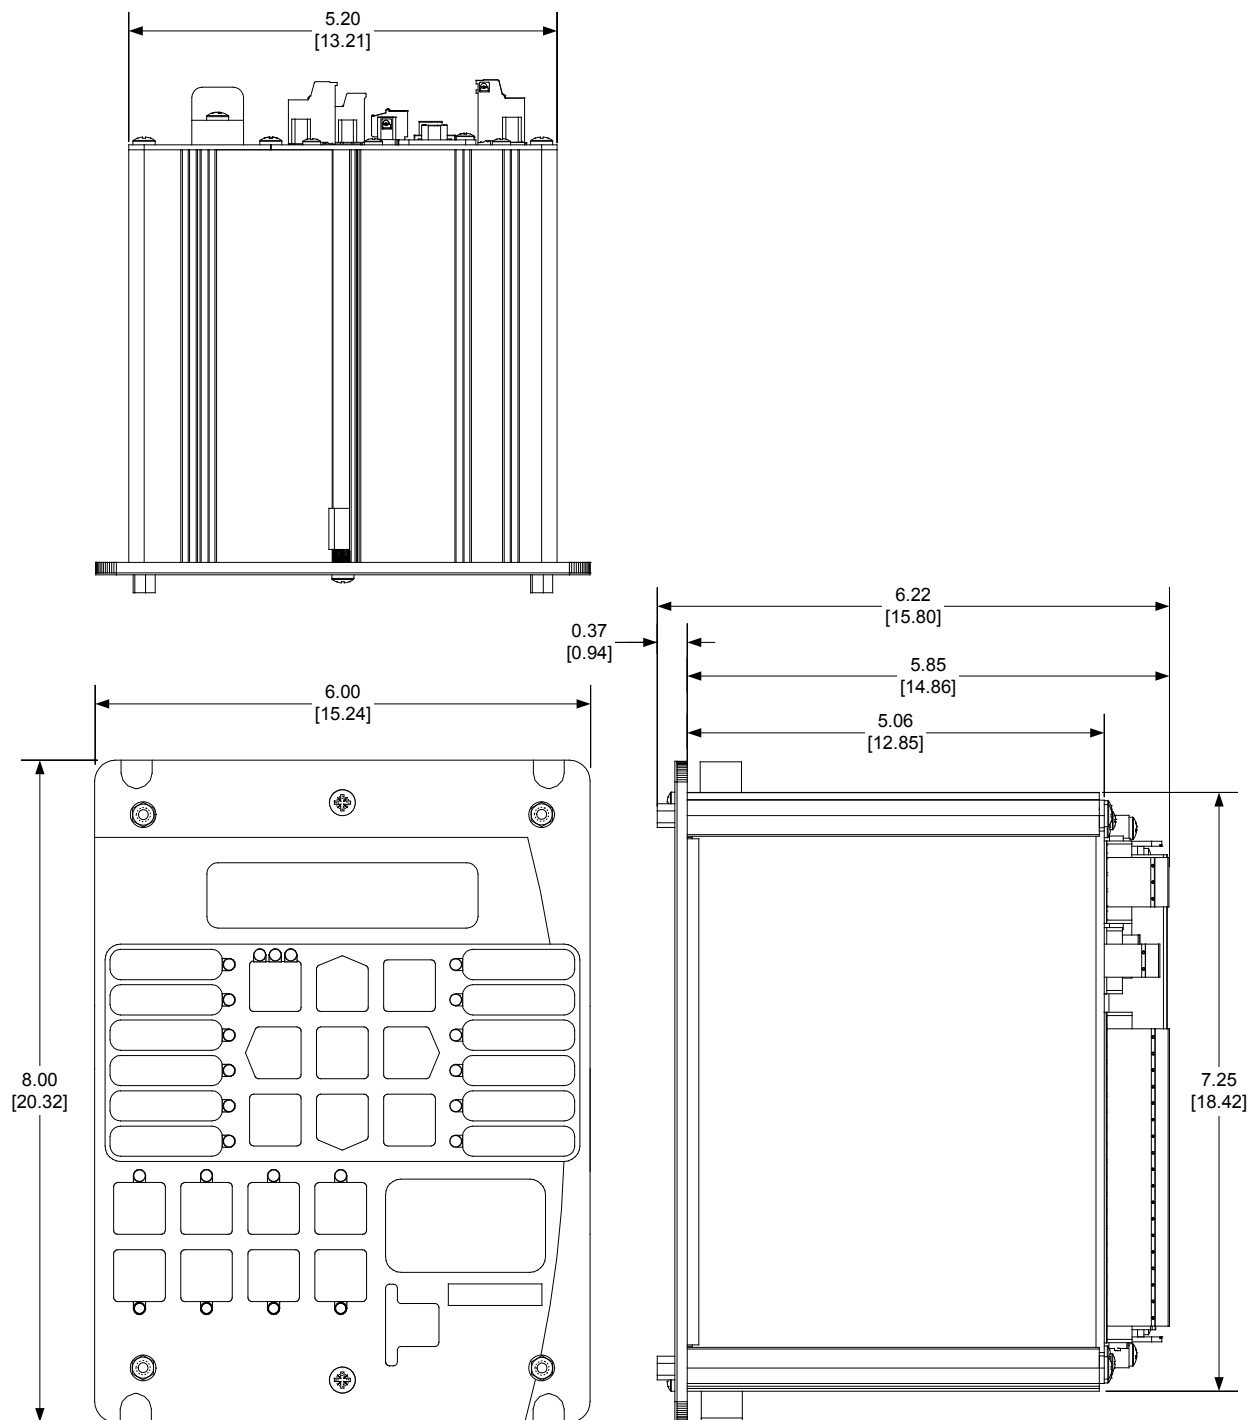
M-7651A D-PAC Vertical Model Mounting Dimensions
